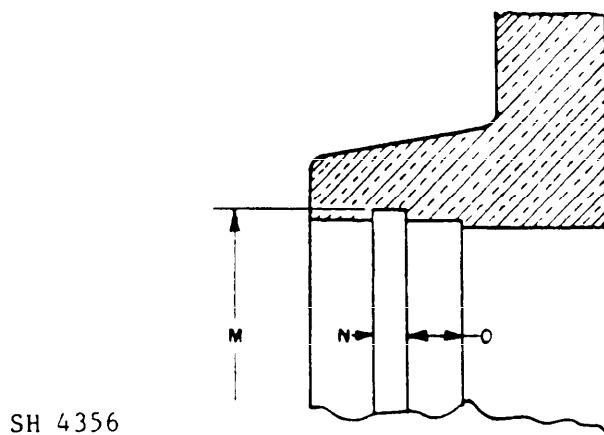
Detail dimensions of groove for preinserted ring of silver brazing alloy.
